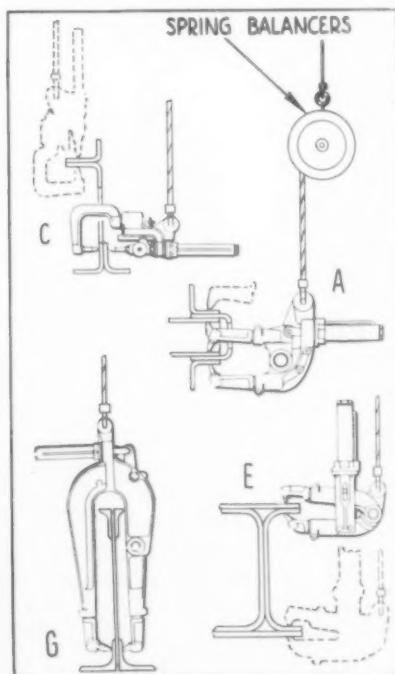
, at left, shows seven basic standardized welding guns; A, bell-crank action; B, scissors; C, C-type direct action; D, expansion gun; E, clam-action; F, push-type, and G, deep-throat rocker-arm type. Photo, Fig. 3 below, a typical welding gun disassembled to show standardized parts which may be interchanged with other standardized parts to vary gun design for different applications. Figs. 2 and 3 by courtesy of Progressive Welder Company, Detroit. Fig. 4, at right, suggests several applications of standard and special welding guns, the latter incorporating basic standardized parts. Letter symbols are the same as in Fig. 2. At C, a C-frame gun; at A, bell-crank action; at E, clam-action; and at G, deep-throat rocker-arm type. The guns are suspended from spring balancers.
